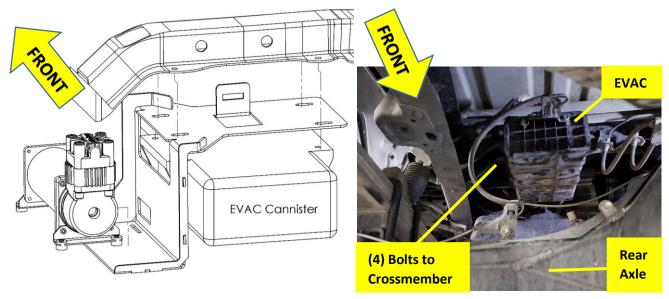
TUNDRA-101 with Air Compressor and EVAC, Exploded View
